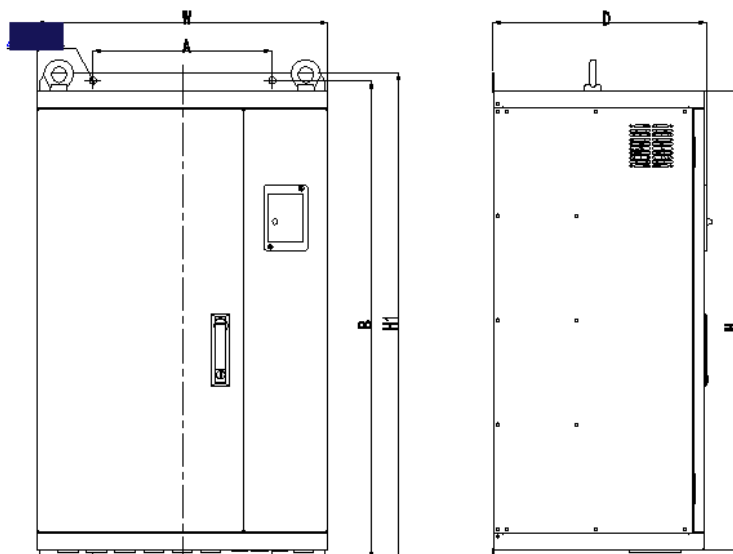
Appearance and installation dimension of SET-300A series (Metal housing structure)
